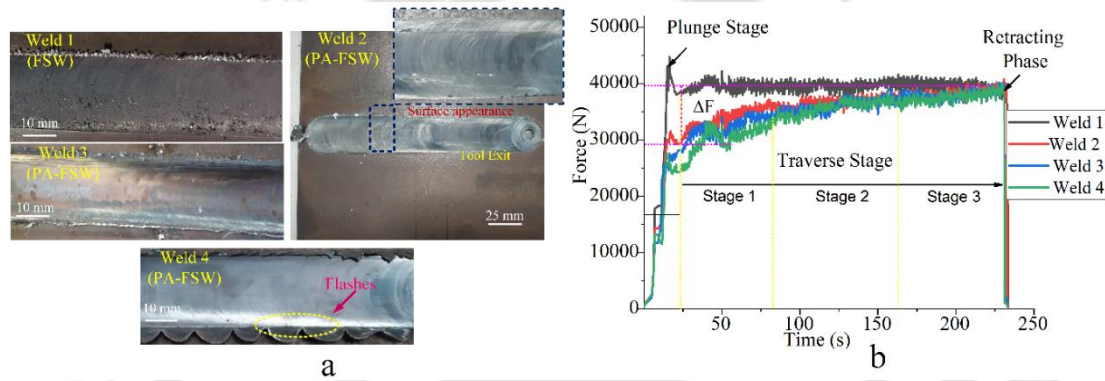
(a) Weld top surface appearance at different welding conditions, and (b) the corresponding downward axial force during the welding
